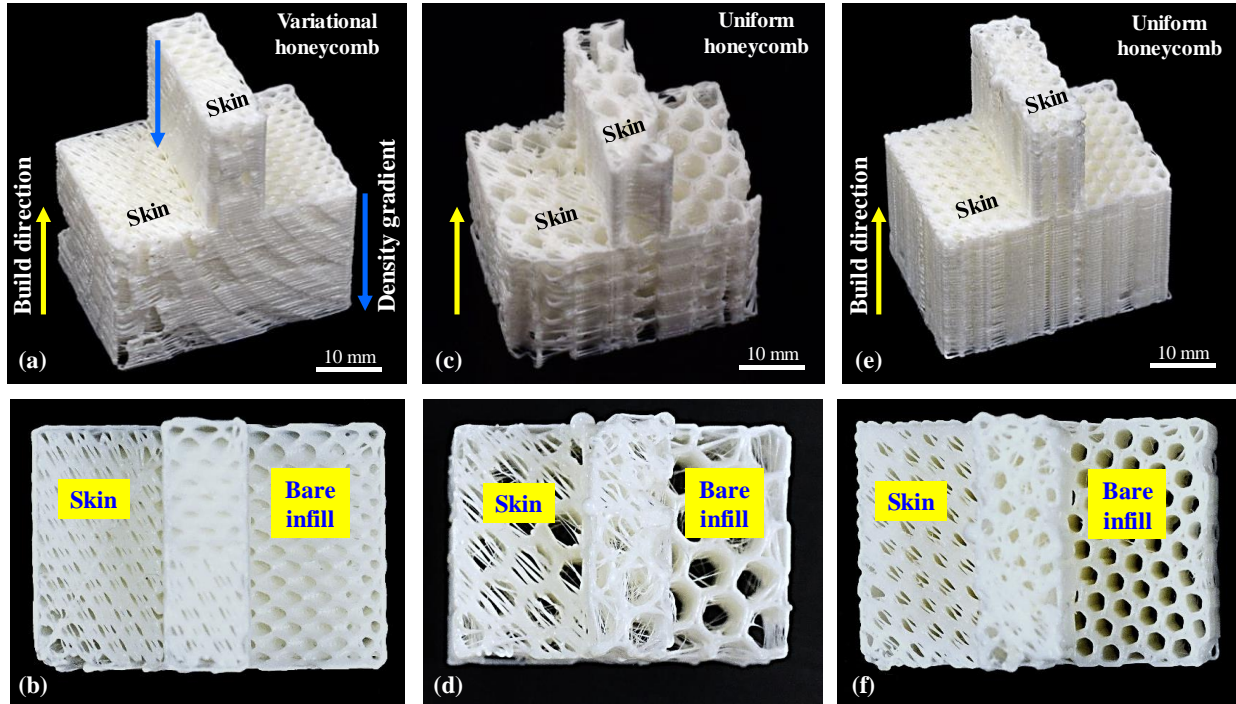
(a) Proposed adaptive density variational honeycomb infill, (b) parts of the overhanging skin printed on the proposed infill, (c) uniform honeycomb infill with low density, (d) parts of the overhanging skin printed on the uniform honeycomb infill with low density, (e) uniform honeycomb infill with high density, and (d) parts of the overhanging skin printed on the uniform honeycomb infill with high density.
